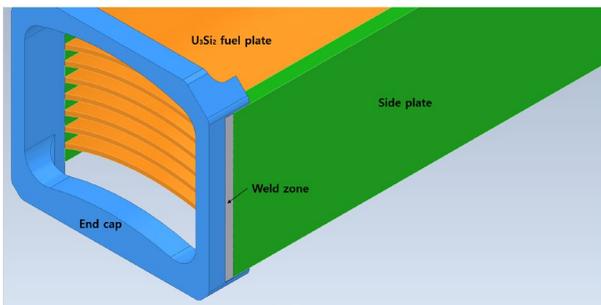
Weld zone of KIMQI-GTA assembly
